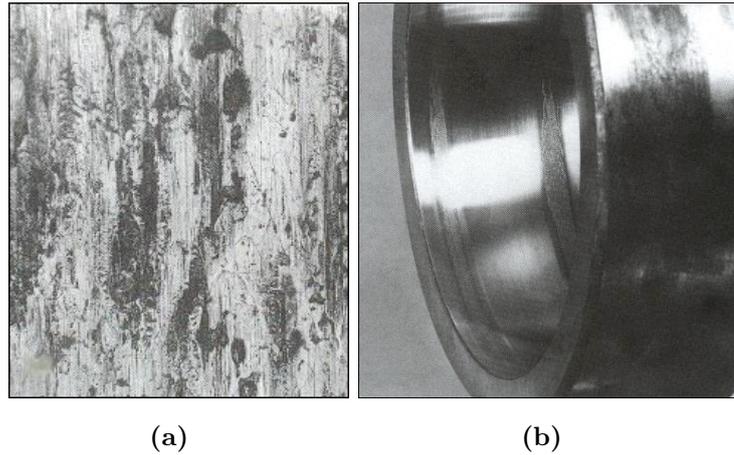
Smearing on the surface of (a) a roller from a spherical roller bearing magnification 100x (b) the outer ring from a spherical roller bearing [50].
